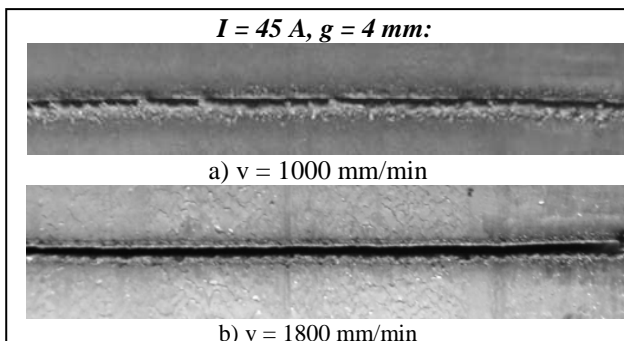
The appearance of the cut edge of AISI 304 stainless steel, cut at: I = 45 A, g = 4 mm
